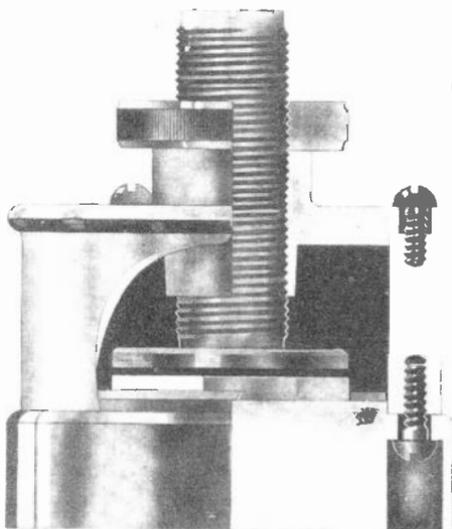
A cut-away drawing illustrating the parts of a variable air-gap crystal holder. (Courtesy Commercial Radio Equipment Co.)
